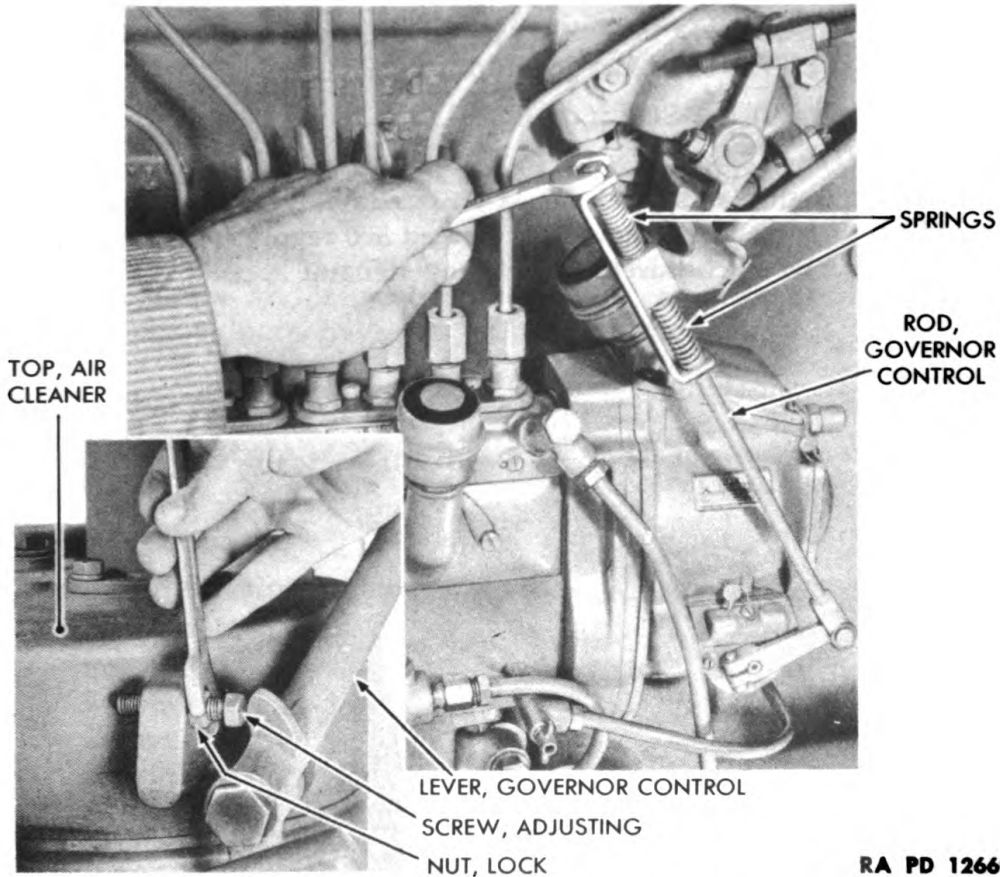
Adjusting Governor Control Rod Springs and Stop Screw
